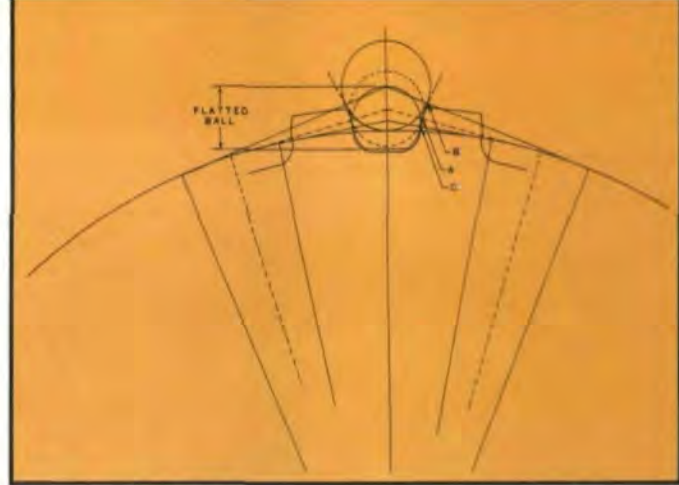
In this example, the first standard increment larger than the exact ball contacts outside the outside circle limit; the next size smaller contacts the root circle. The ball must be flattened to get a good measurement. This happens with stub tooth gears with low pressure angle.
